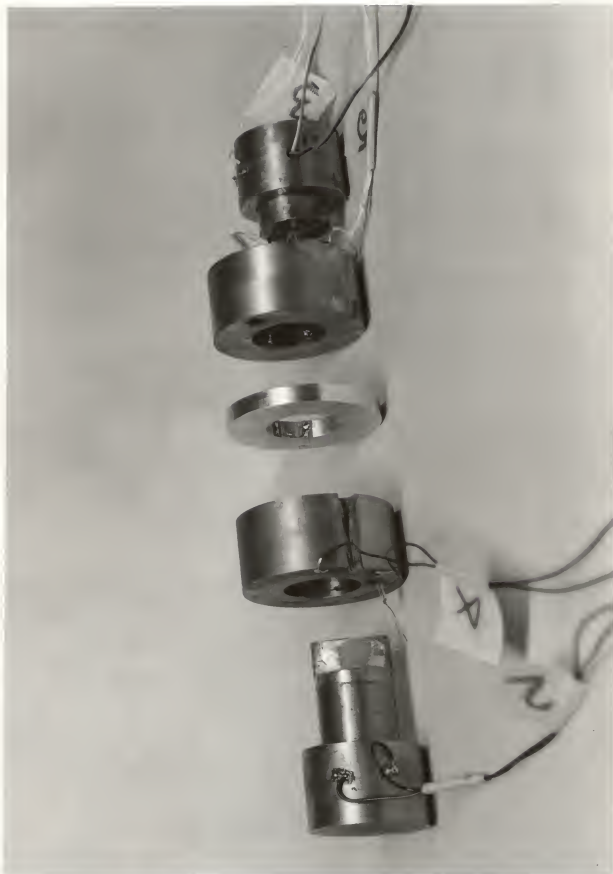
The two steel test-pieces with studs and aluminum gasket.
